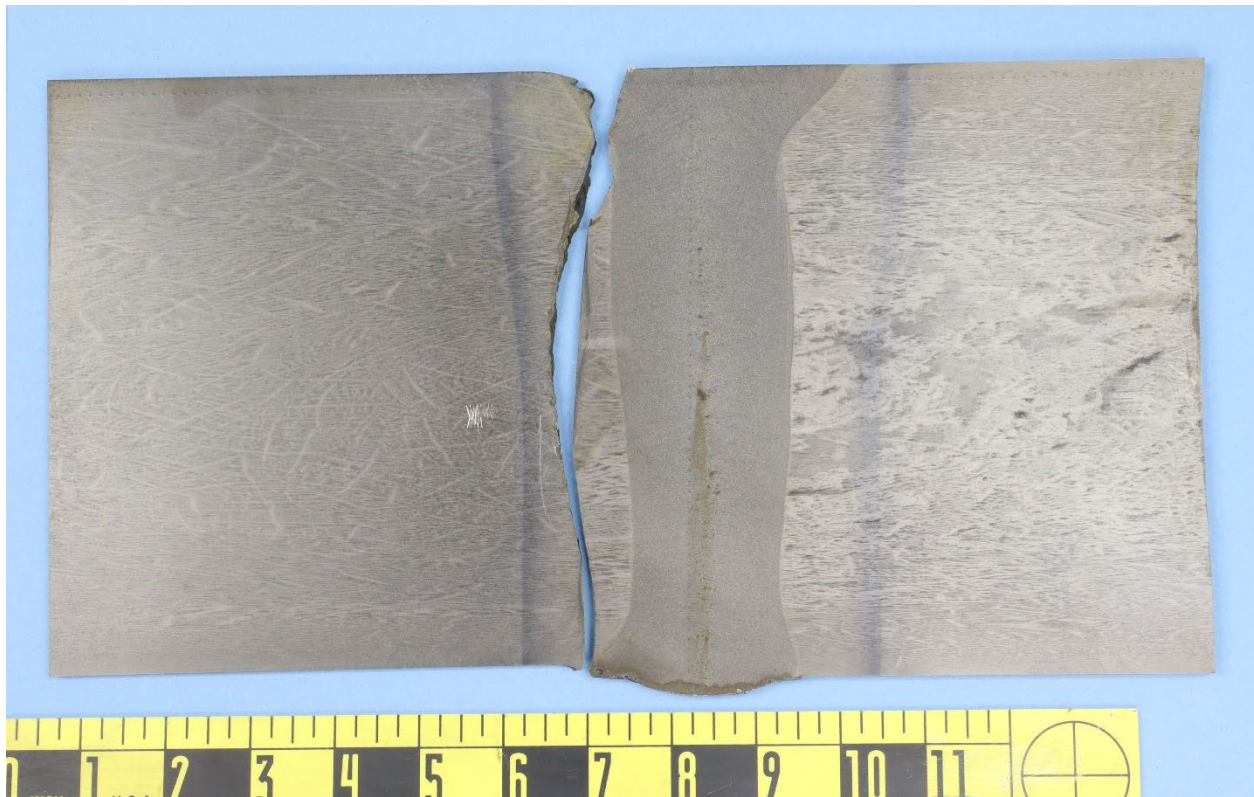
View of the longitudinal section across the weld, after etching.
